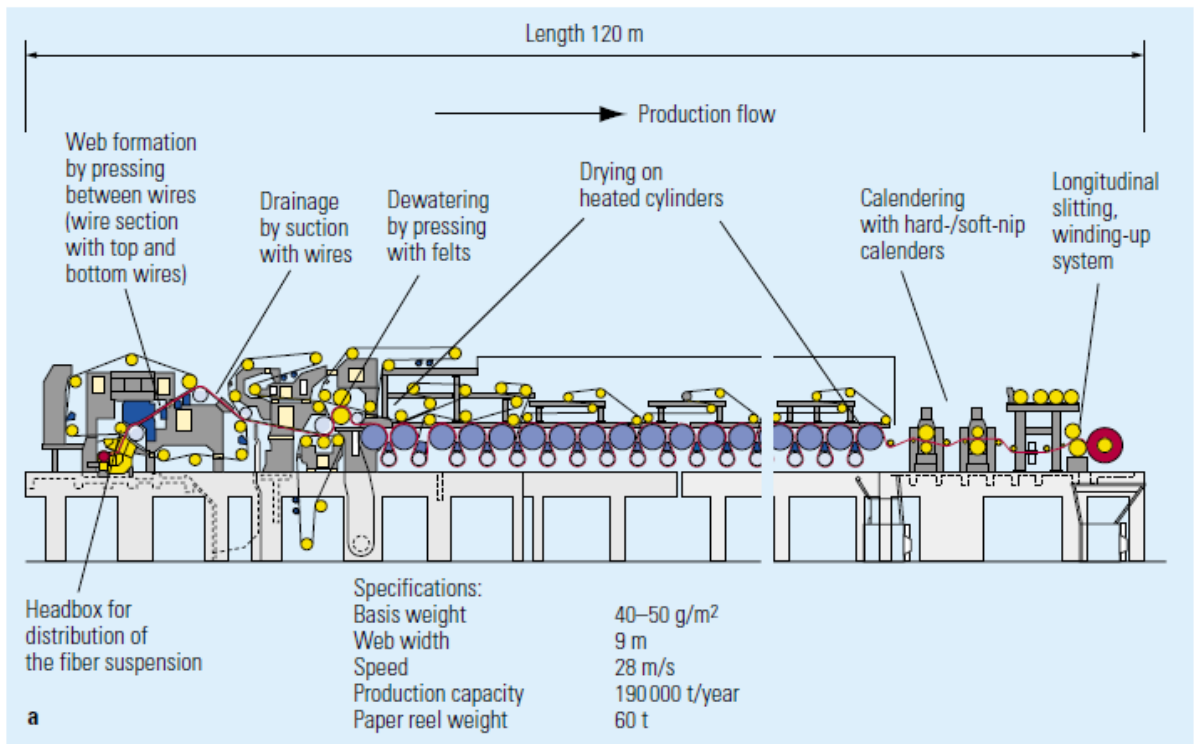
The fastest paper machine for the production of newsprint in 1997, example of a fourdrinier paper machine (Voith Sulzer Paper Technology, Germany, 1997). -
